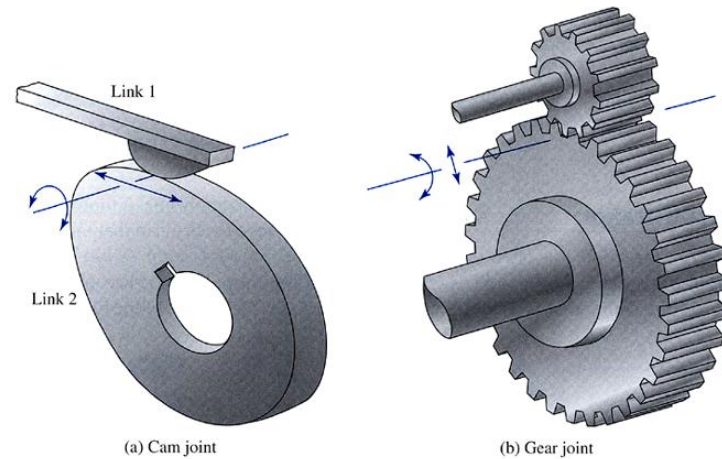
Higher-order joints: (a) Cam joint and (b) Gear joint.
